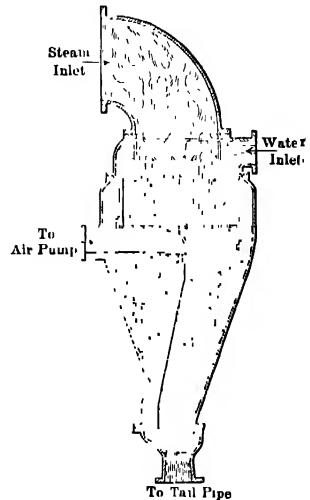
Section through Condenser Head of a Wheeler Barometric Condenser.
